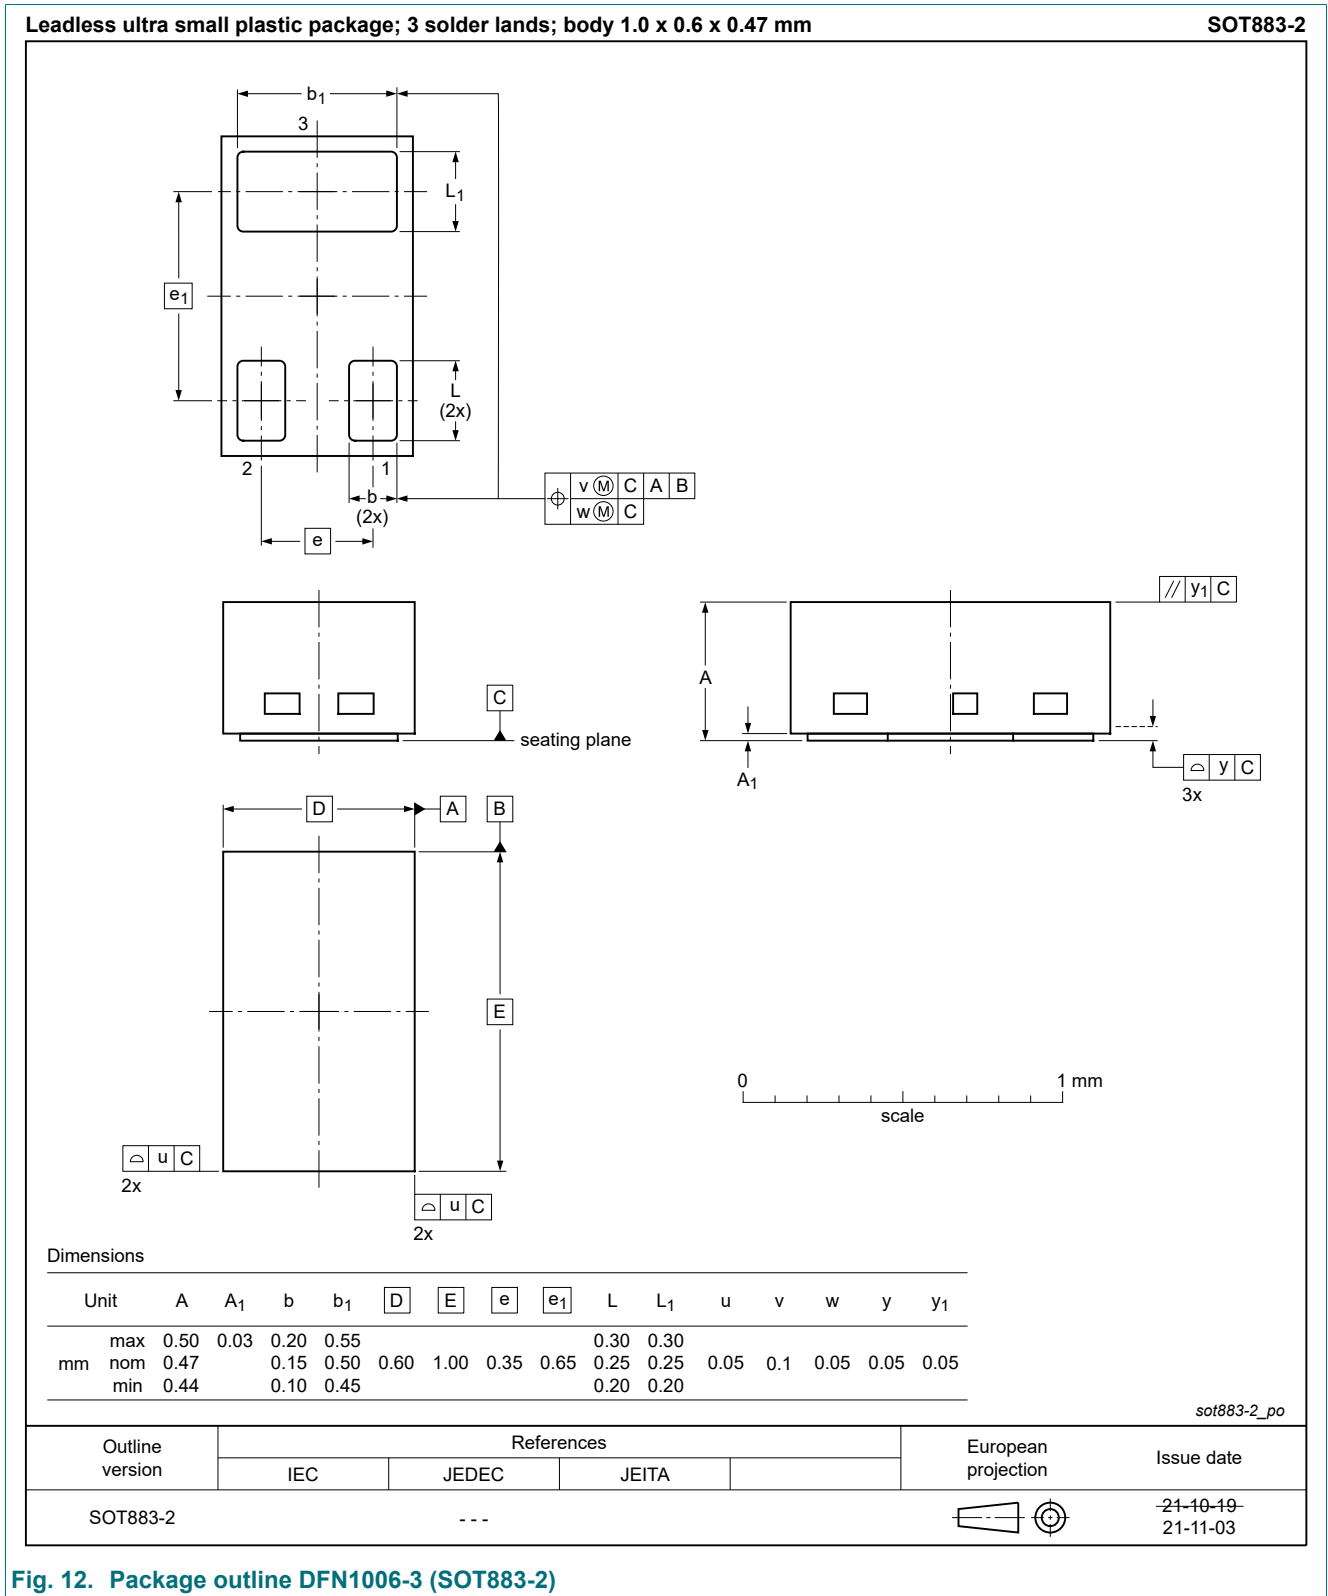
Package outline DFN1006-3 (SOT883-2)
